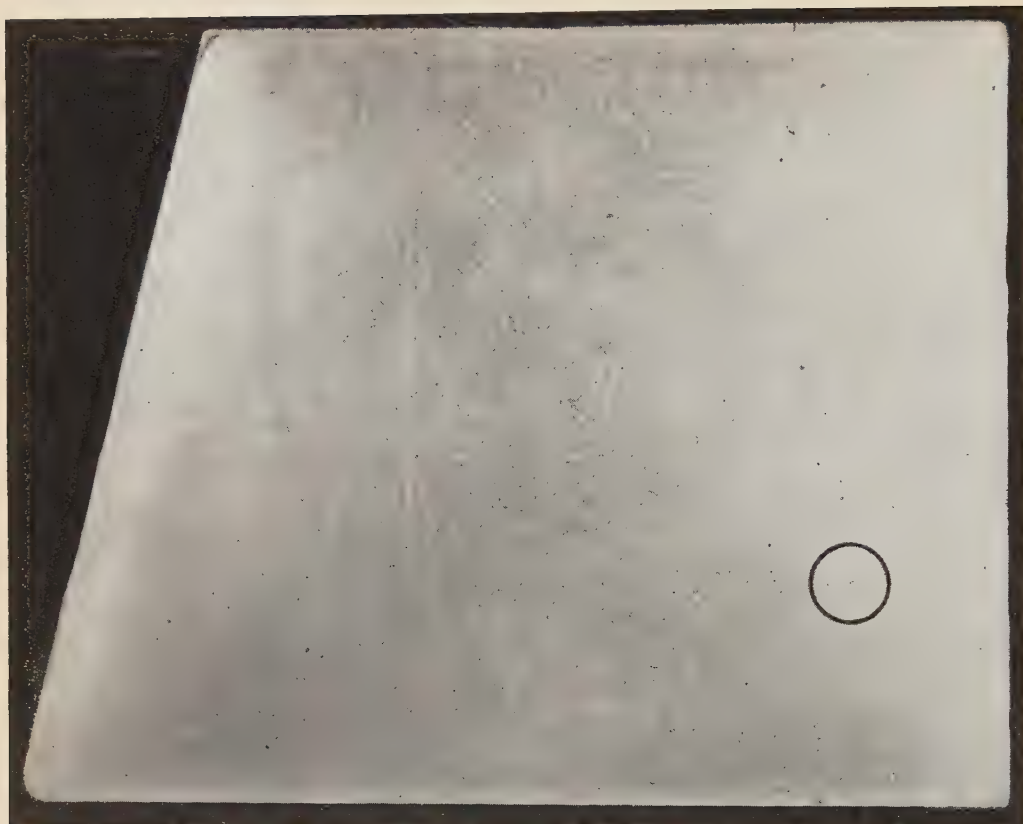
Small crack (position shown by circle) in extruded rectangular section.
